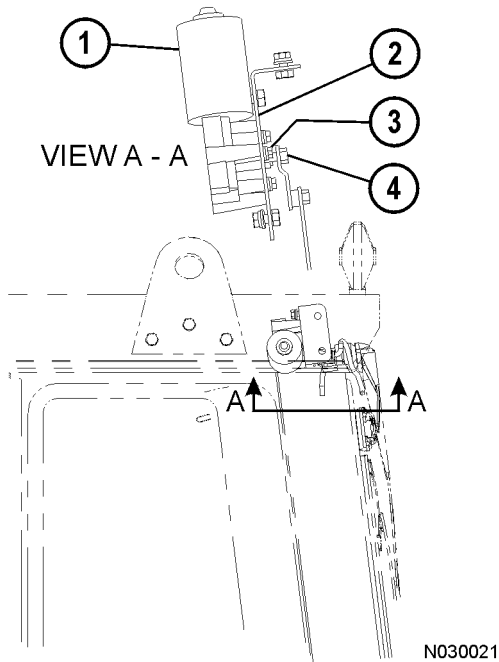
WINDSHIELD WIPER REMOVAL/INSTALLATION
